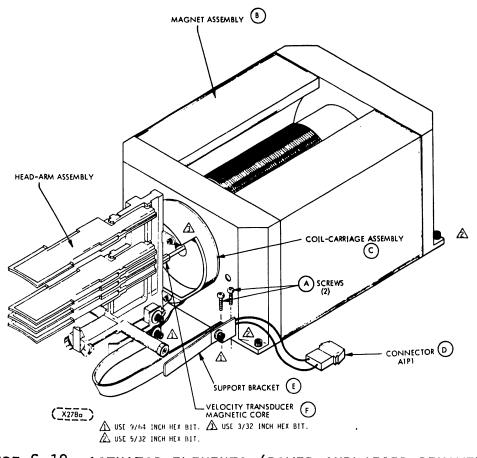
ACTUATOR ELEMENTS (POWER AMPLIFIER REMOVED)
